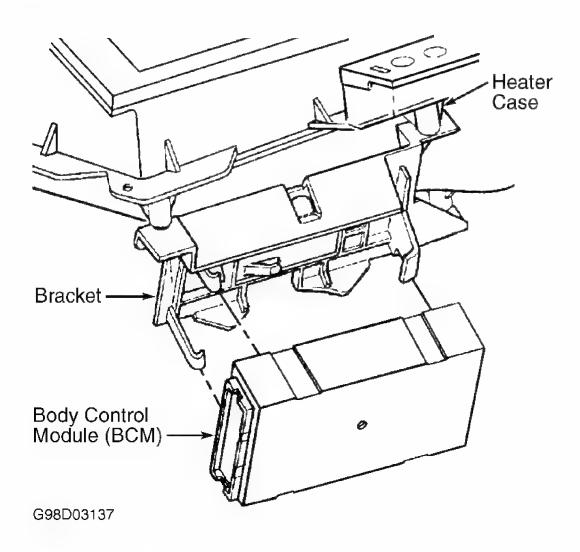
Body Control Module Mounting Courtesy of GENERAL MOTORS CORP.
